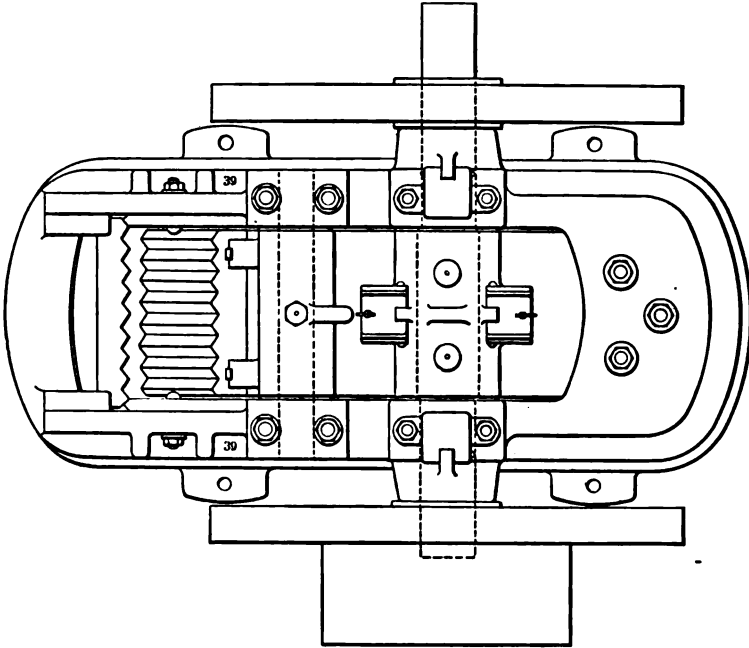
PLAN OF BLAKE-TYPE BREAKER.
